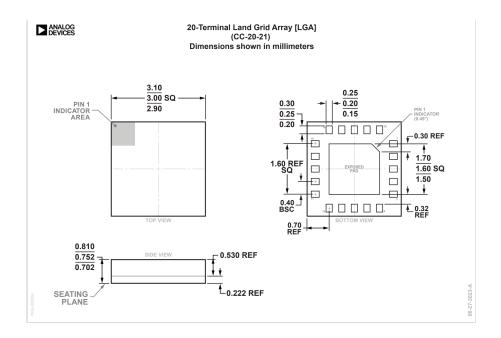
20-Terminal Land Grid Array [LGA] 3 mm × 3 mm Body and 0.75 mm Package Height (CC-20-21) Dimensions Shown in Millimeters
